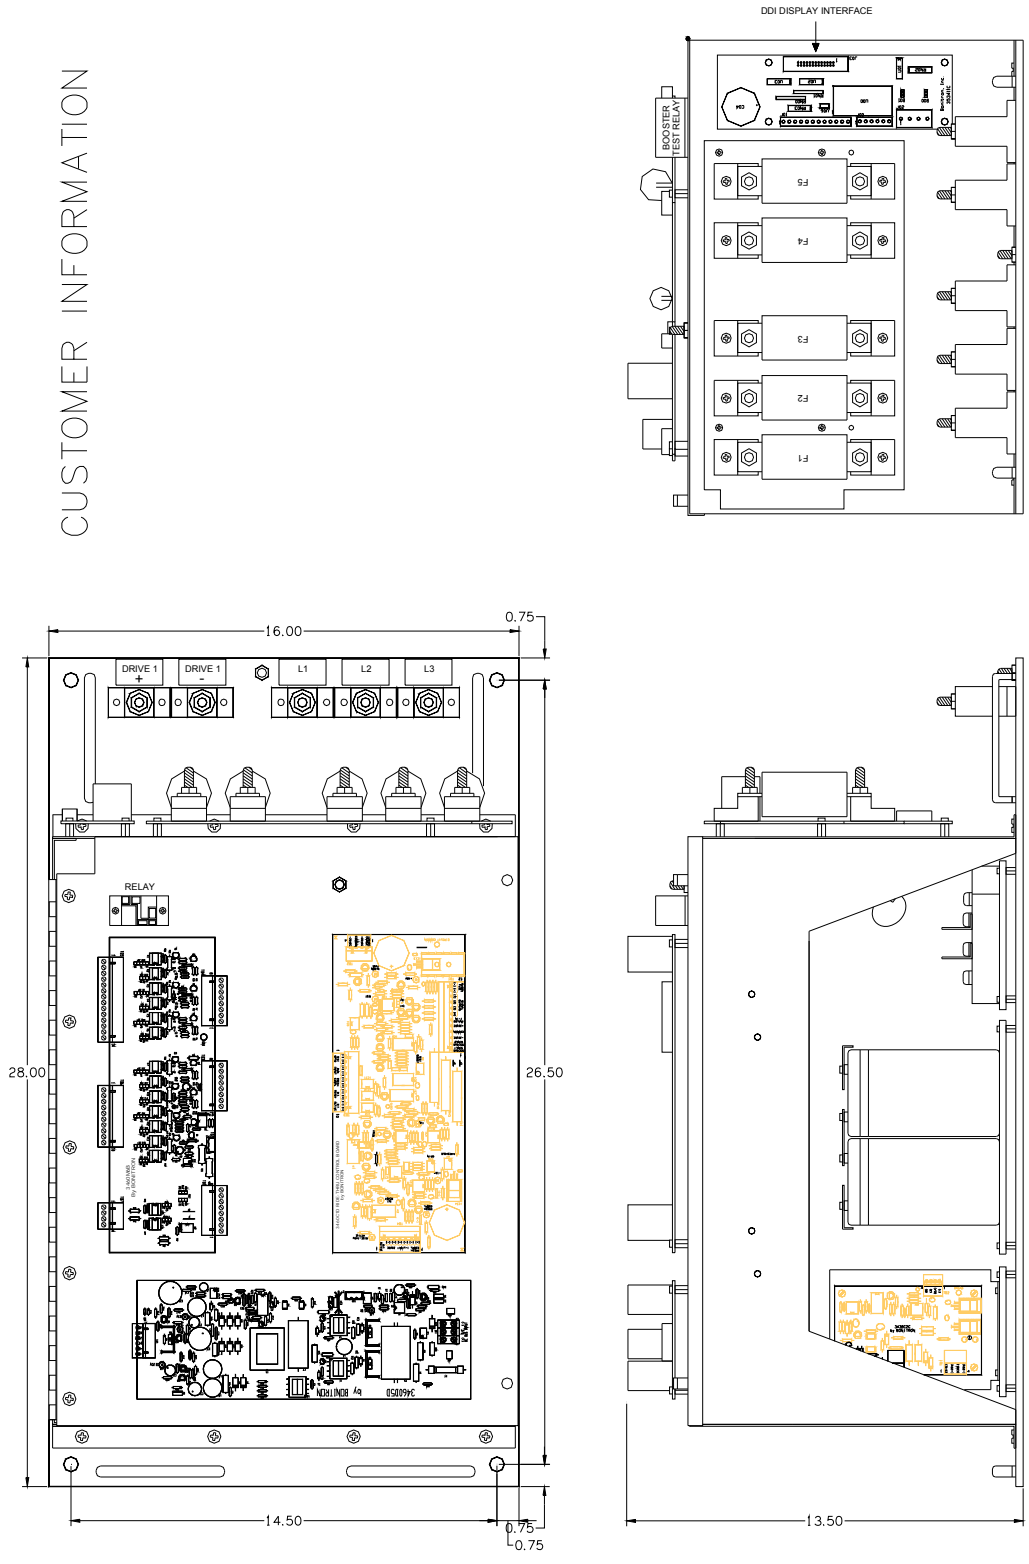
3460R-R11 Chassis Dimensional Outline
